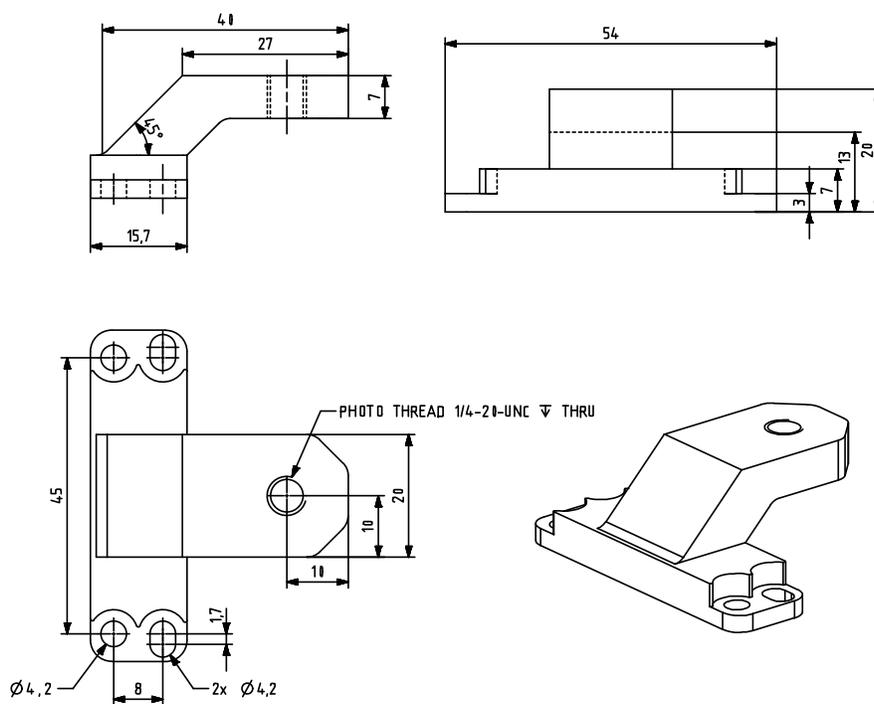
Dimensional drawing of MECH-60MM-BRACKET-T
